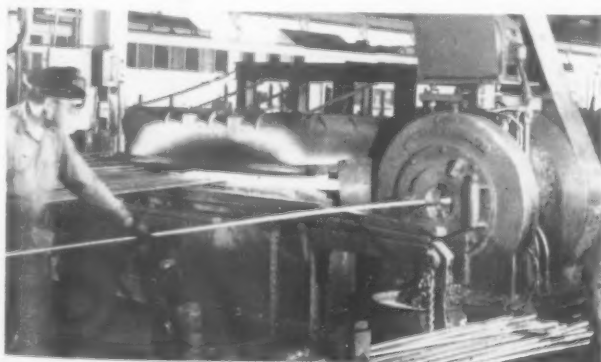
Reducing the ends of steel tubes, by rotary swaging, at the Pacific Tube Company's steel tube mill, Los Angeles, Cal. The swager shown is by the Etna Machine Company, and the tube ends are preheated in the furnace shown immediately at left of the machine. The tubes are hand fed into the dies, thus indicating the comparatively slight grip required to hold parts. The swaging machine is an Etna, by Etna Machinery Co., Toledo, Ohio.
